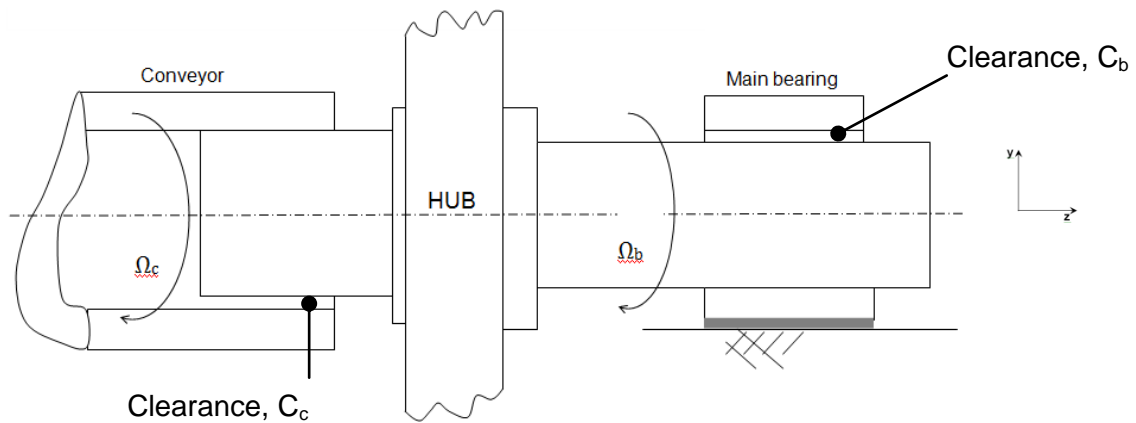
The bearing clearance positions for conveyor and bowl (main bearings)
